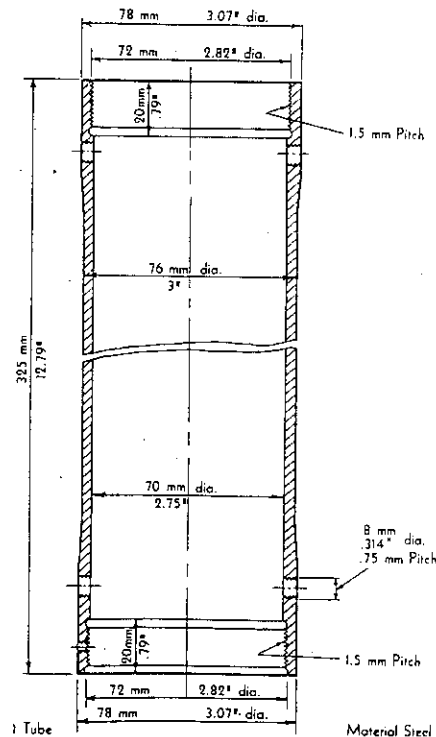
Drawing of rocket motor tube for 8-cm HE projectile.
